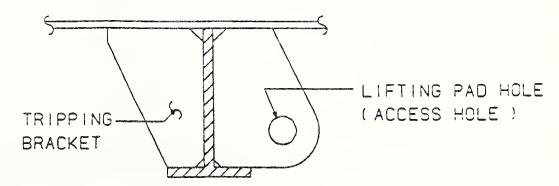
Example of an Access/Lightening Hole - Lifting Pad Hole
